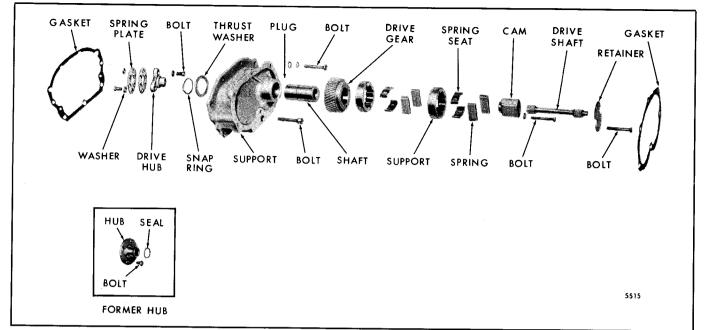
Blower Drive Support Details and Relative Location of Parts (8V-53 Engine)
